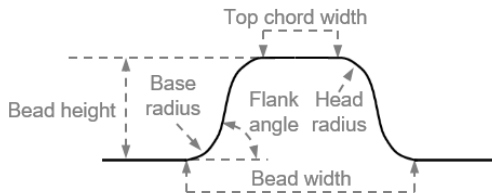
Bead cross section and bead parameters adapted from Emmrich (2004)
